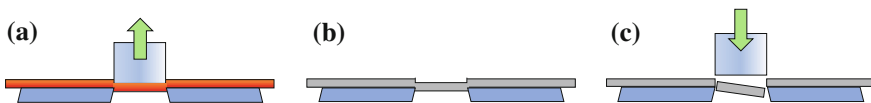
Schematic of hot half cutting: a the cutting is done in hot condition but interrupted before the slug is separated, b once the part is cooled, c it is then hard cut (re-created after [38])
